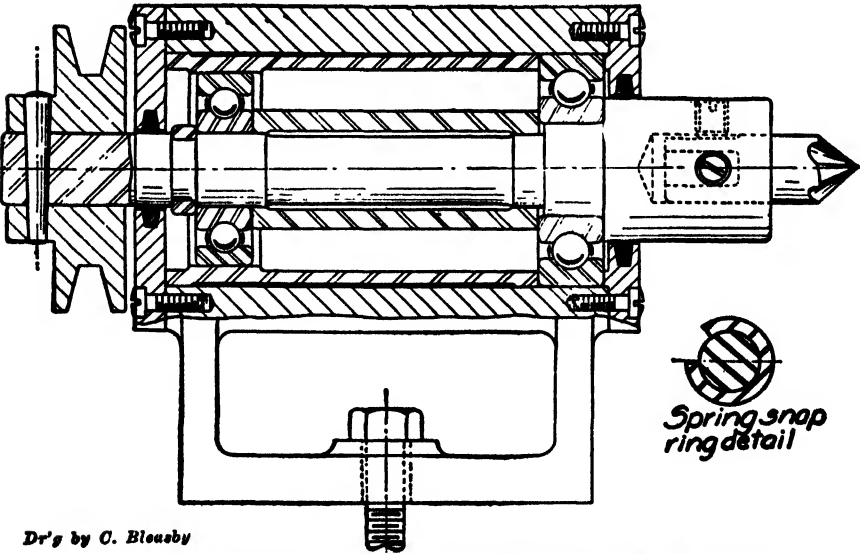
Burring or Countersinking Head—Ball Bearing Design.
